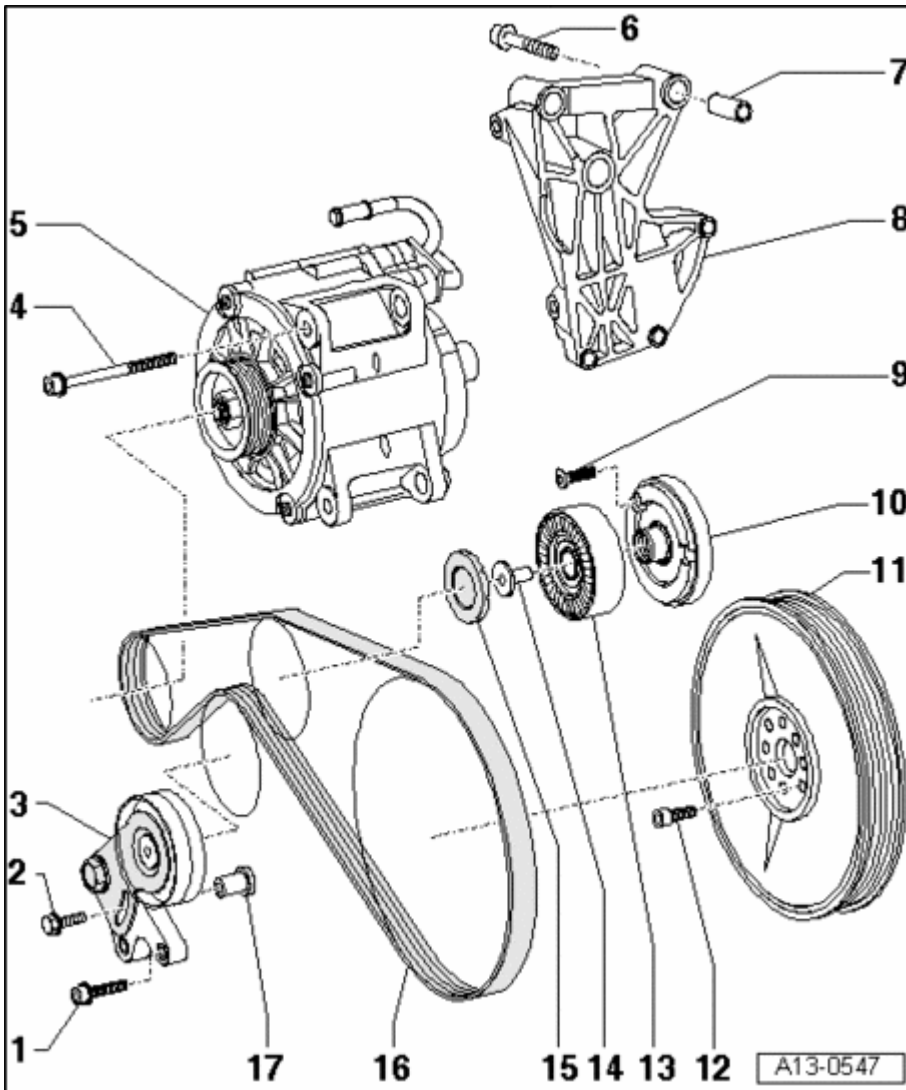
Ribbed Belt Drive For Generator, Component Overview
